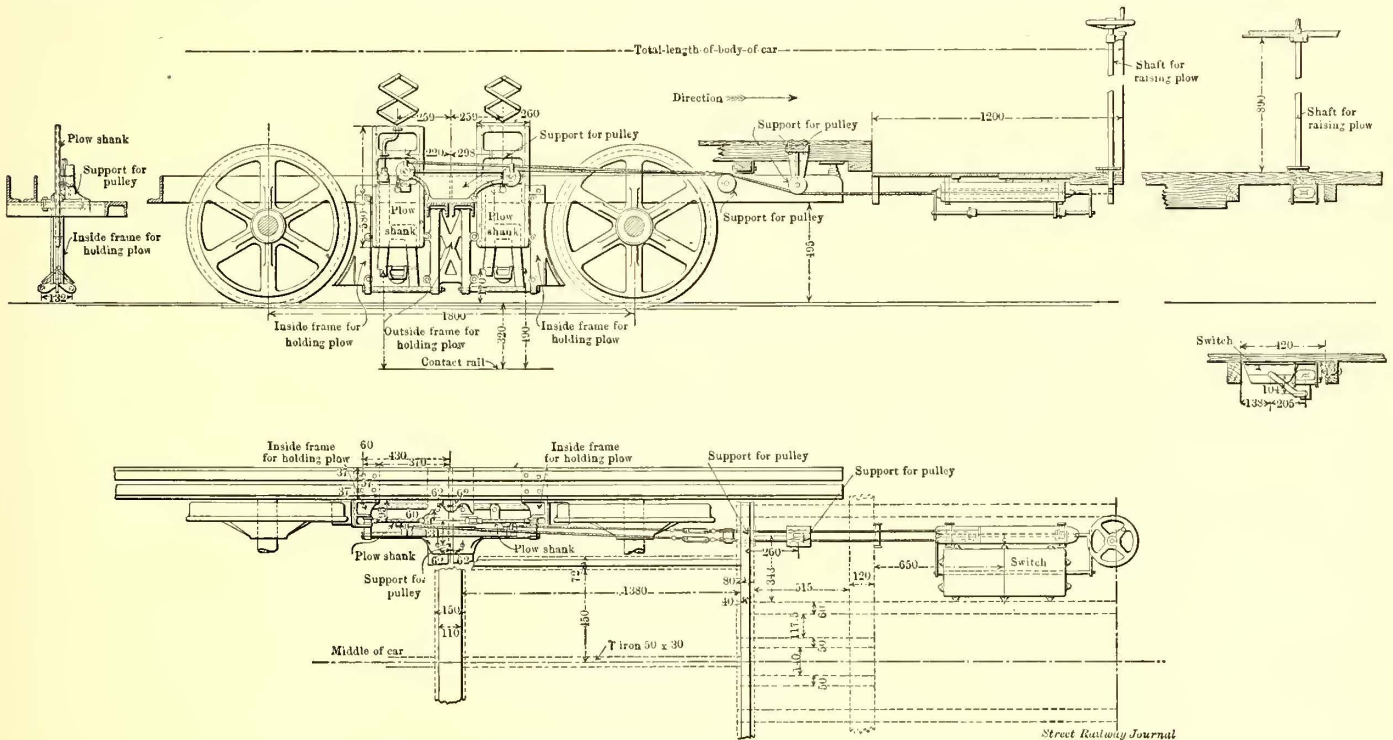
SIDE ELEVATION, CROSS SECTION AND PLAN OF PLOW
